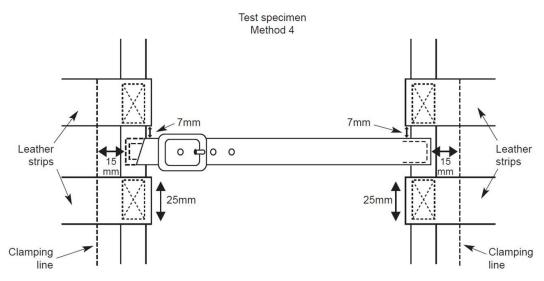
CUTTING OF TEST SPECIMEN—WHOLE ASSEMBLY WITH SEWN ON STRIPS-BUCKLE STRAP ATTACHED TO SLING BACK STRAP
